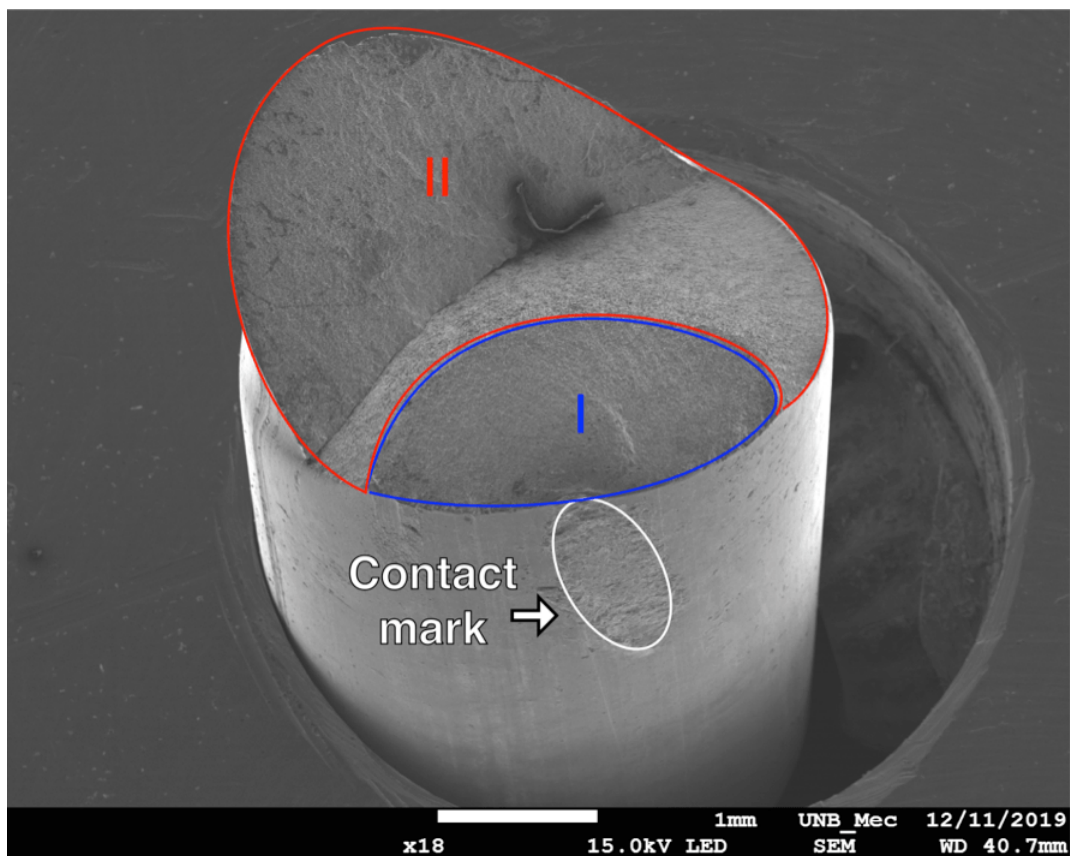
Fracture surface of the specimen no. 2.
